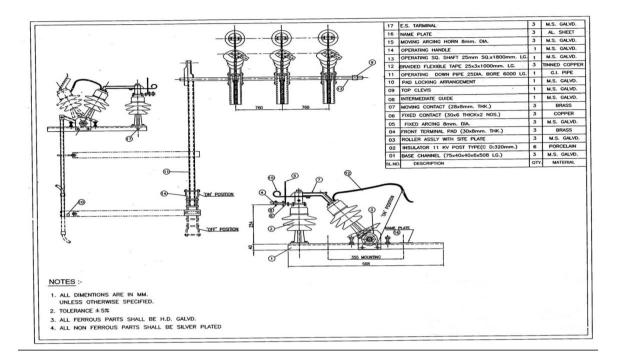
, Rocking Type, 2 Post G.O.A.B.Switch
